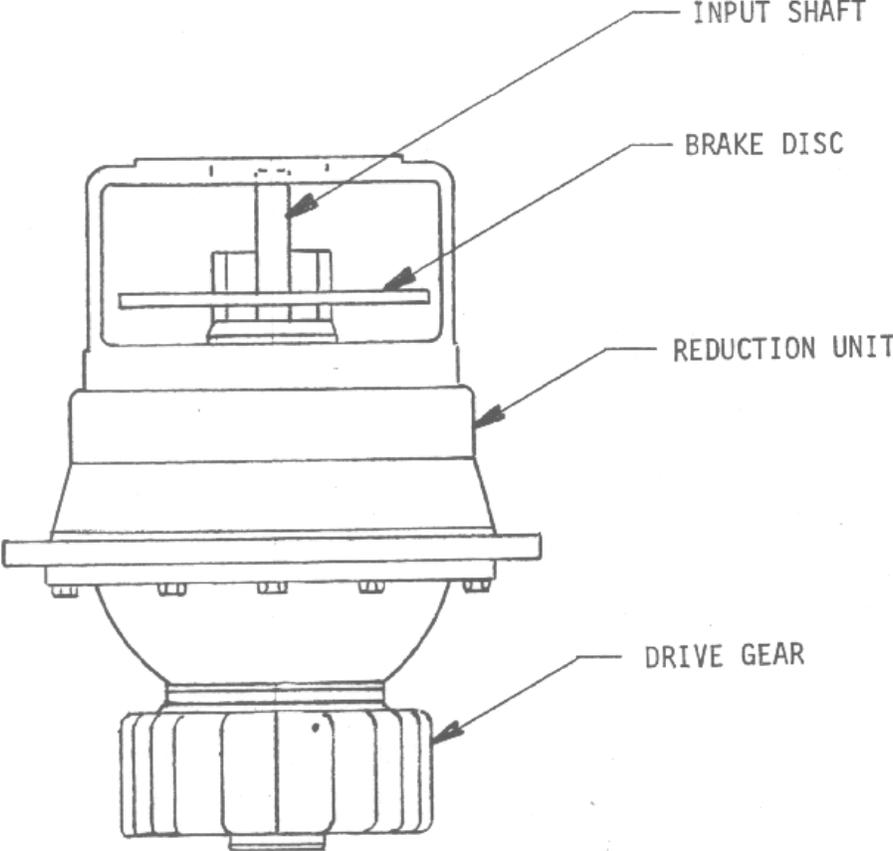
SWING SPEED REDUCER ASSEMBLY
